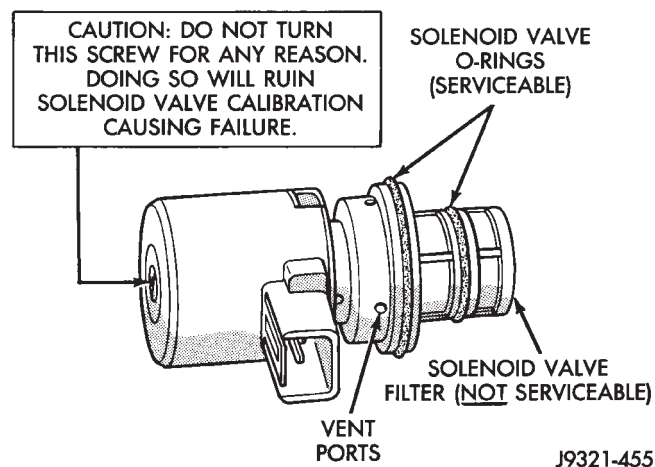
Governor Pressure Solenoid Valve O-Ring And Vent Location
